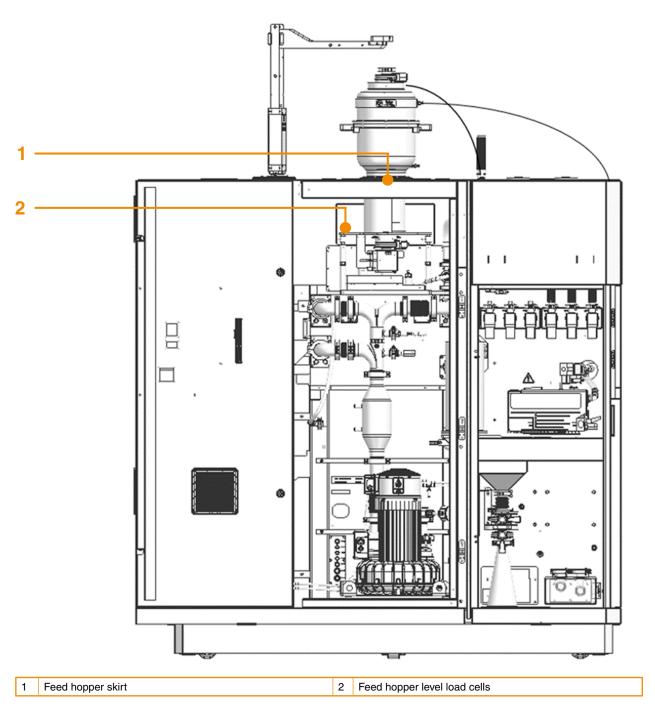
RenAM 500 Flex rear view with rear right-hand and middle cupboard doors open
